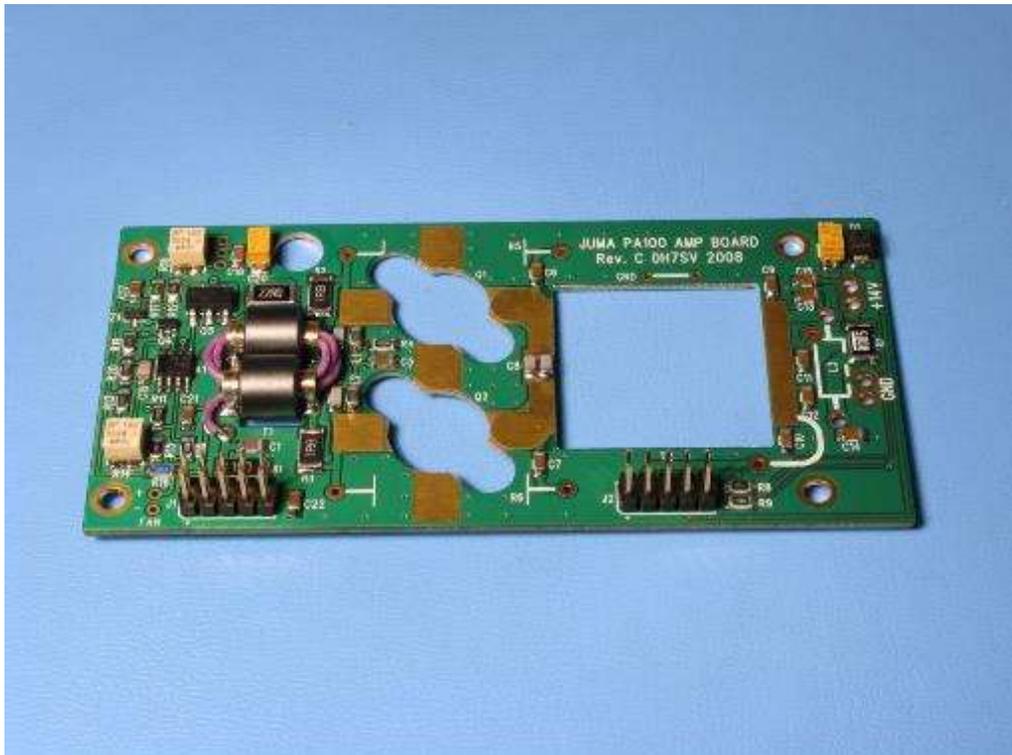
Cut and peel the other end of the wire and solder the end point of the T1 winding.
